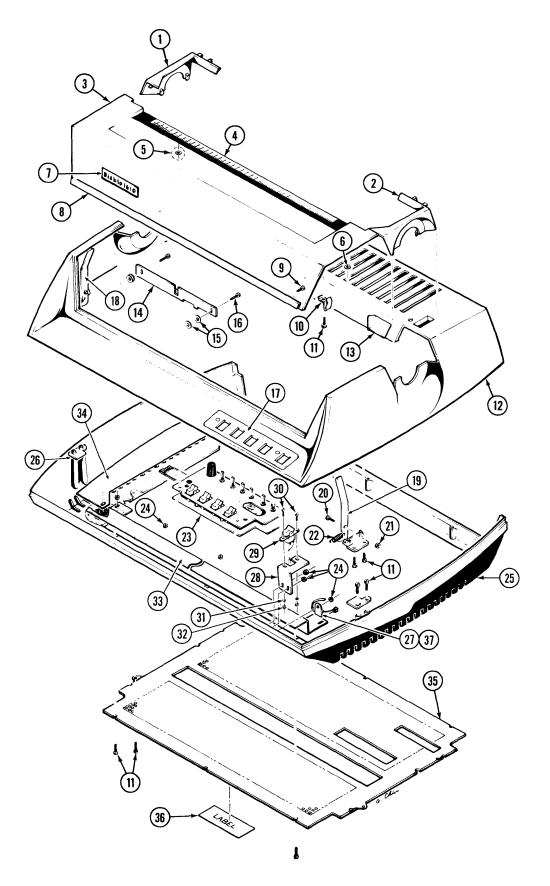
23XXX-XX FINAL ASSEMBLY
